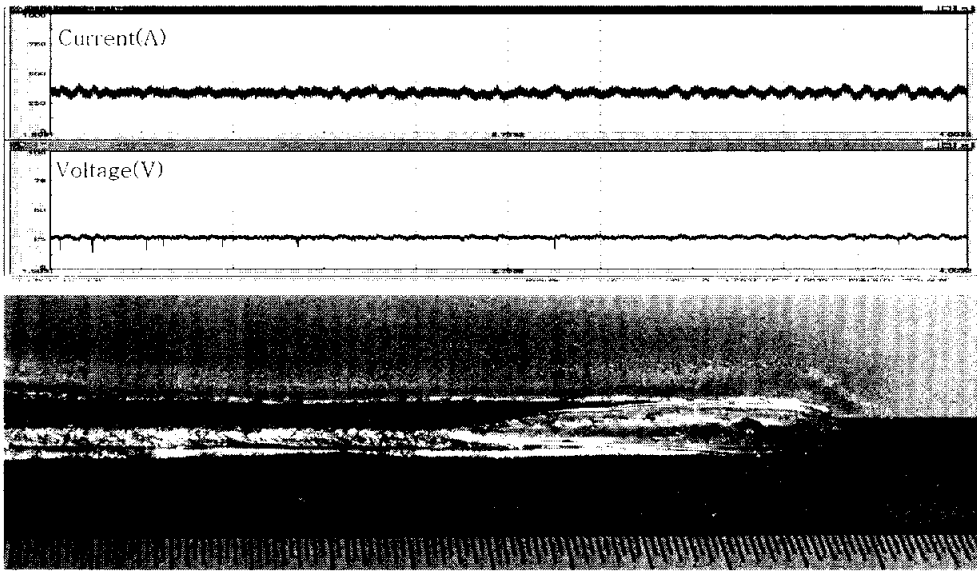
Waveforms and bead shape at welding current 342A
